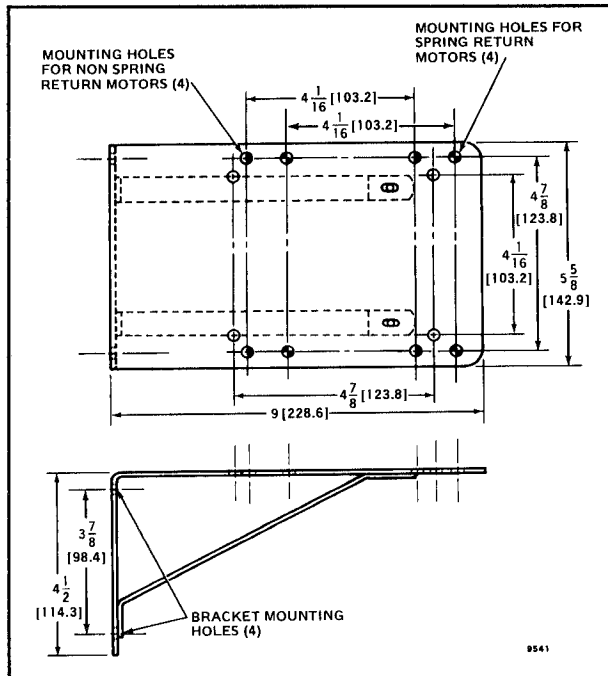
DIMENSIONS IN Ins. [mm IN BRACKETS] OF 101662A EXTERNAL MOUNTING BRACKET FURNISHED WITH Q605A,D LINKAGES.
